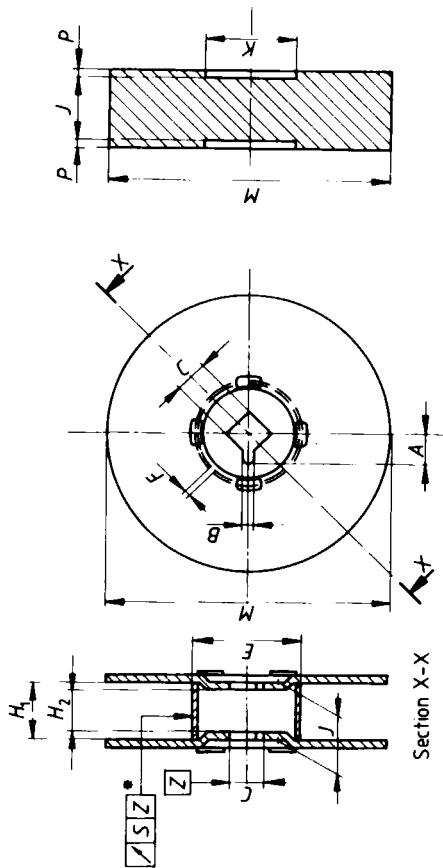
Flange No. 1 (that which first engages the camera spindle)
